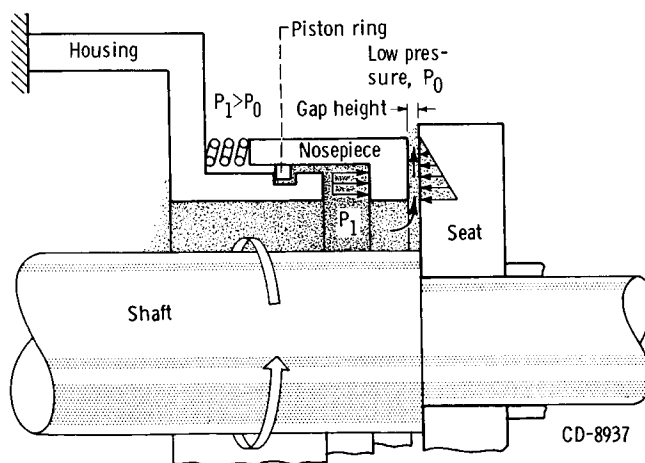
Cross section drawing of seal assembly for supporting studies in oil.
